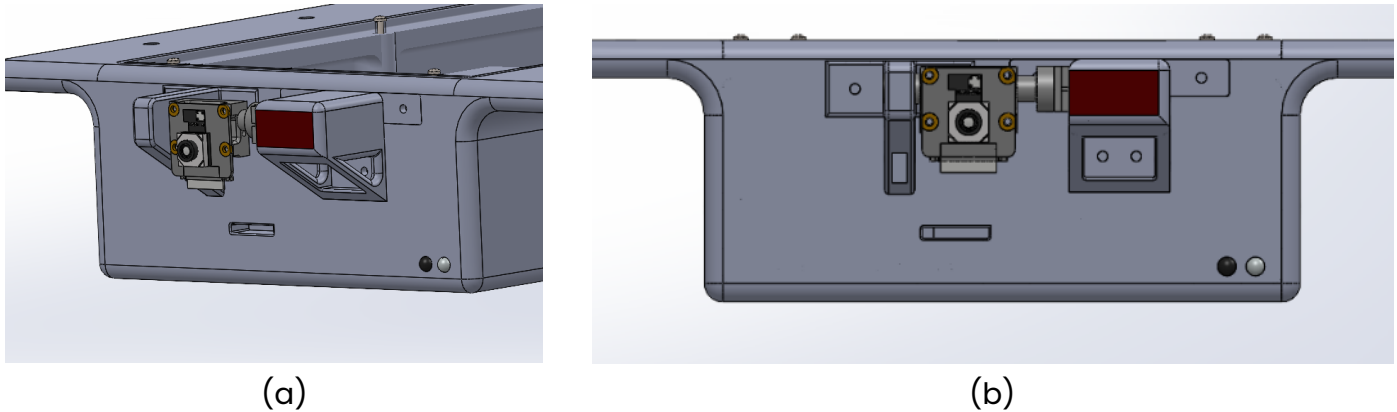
Single servo camera mount mechanism, oblique view (a) and front view (b).
